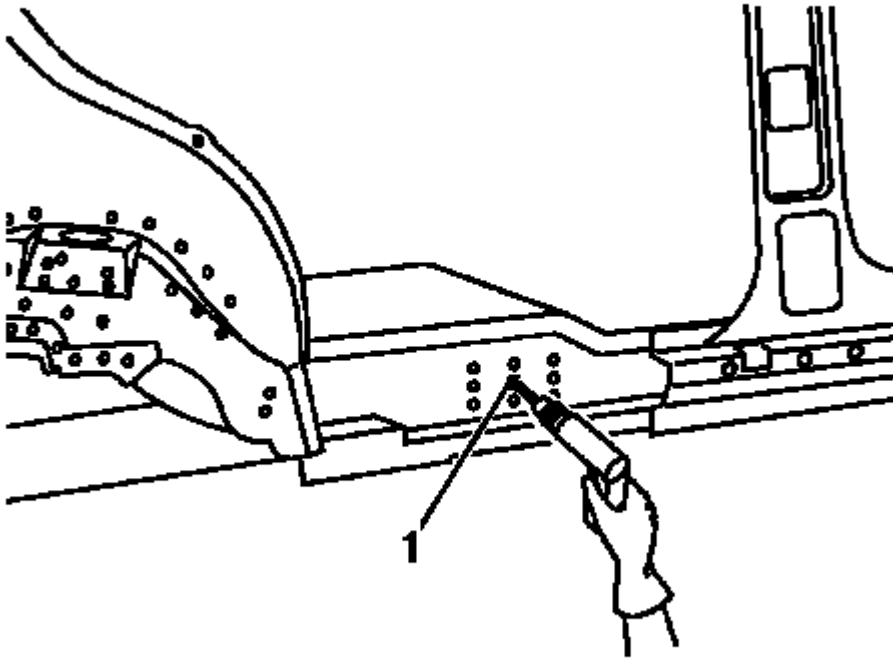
Drilling Out Factory Welds Under Inner Rocker Reinforcement
